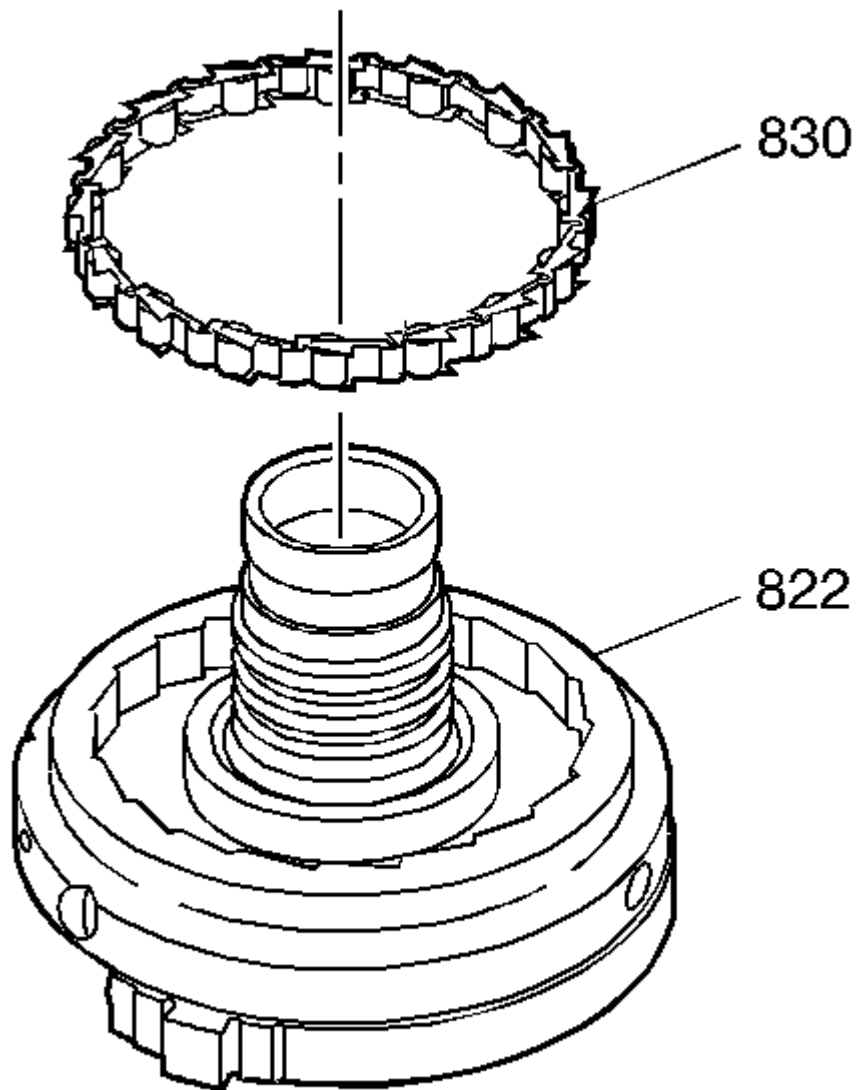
Low Roller Clutch Assembly & Forward & Coast Clutch Support
